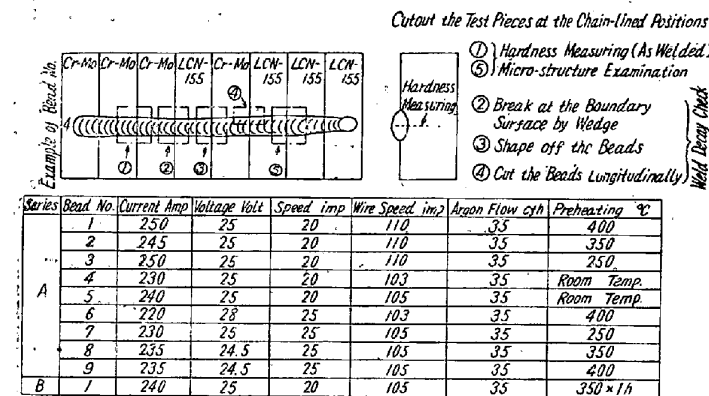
Weld decay experiment and hardenability by welding.
